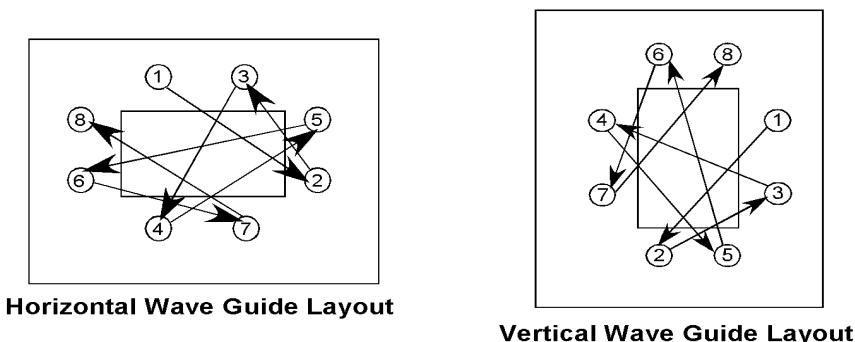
, Typical 8 Screw Mounting Flange Tightening Sequence
